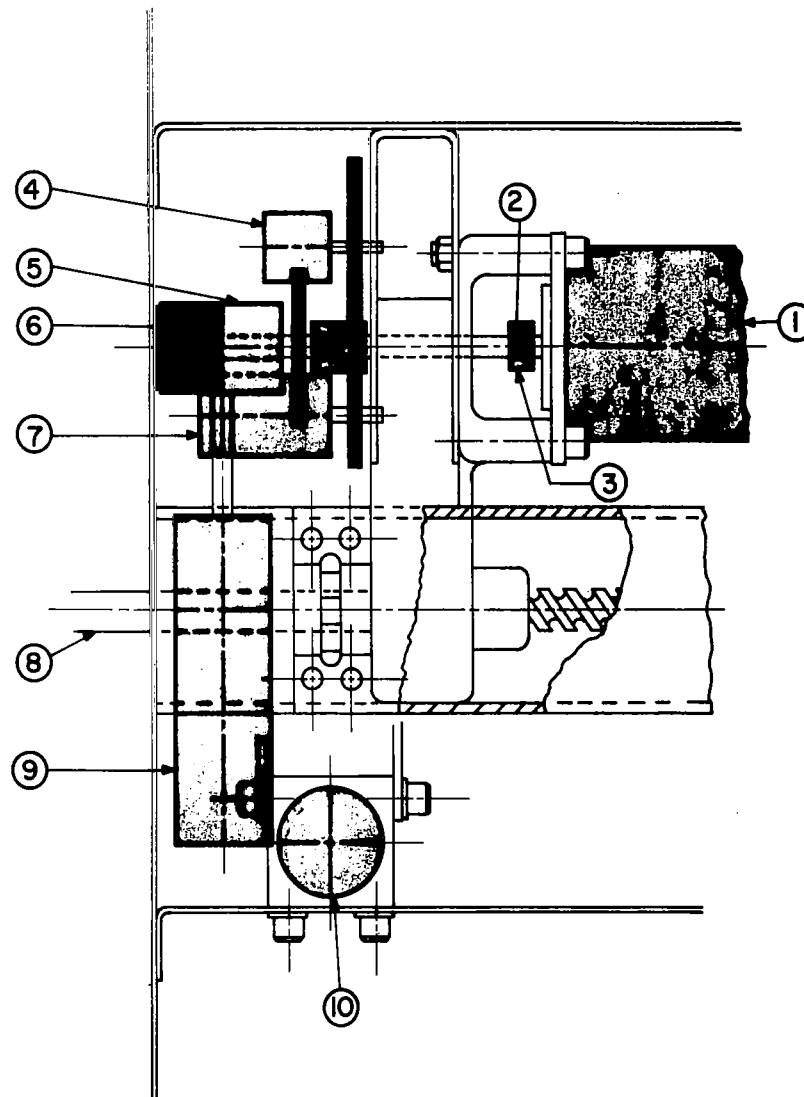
POSSIBLE LAYOUT OF MECHANICAL ELEMENTS
